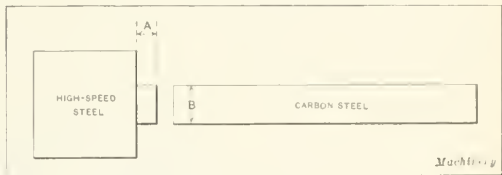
Showing Reduction Necessary on Large Piece before it can be welded to a Small Diameter Shank
